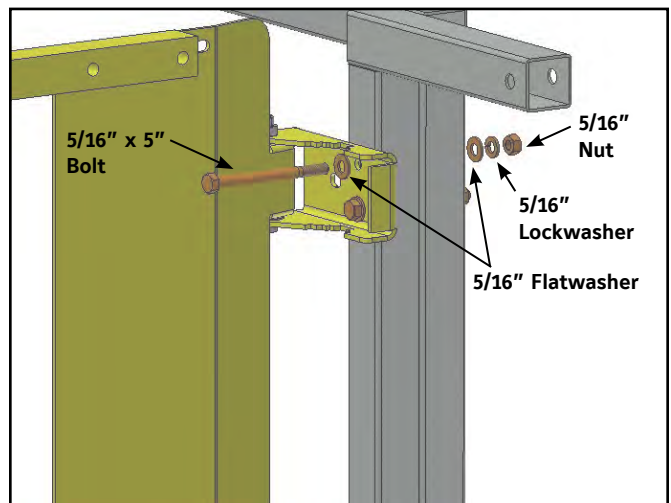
Top Perimeter Guardrail Safety Gate Attachment
